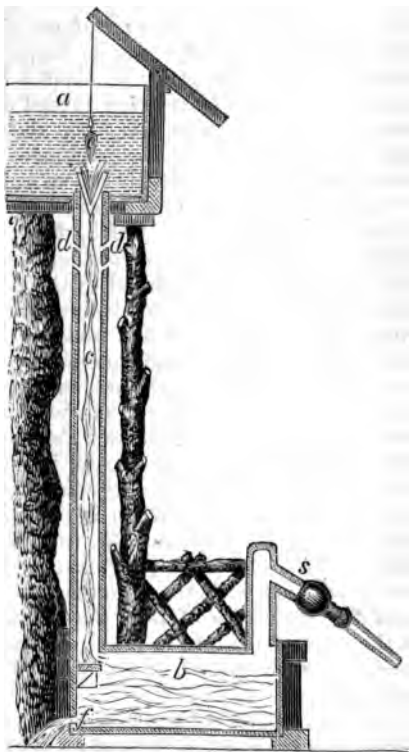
TROMPE OR BLOWING MACHINE OF THE CATALAN FURNACE.
